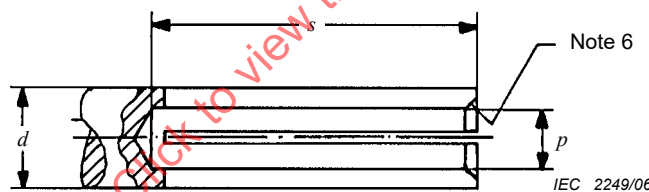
Details of socket centre contact (for notes and dimensions, see Table 2)
